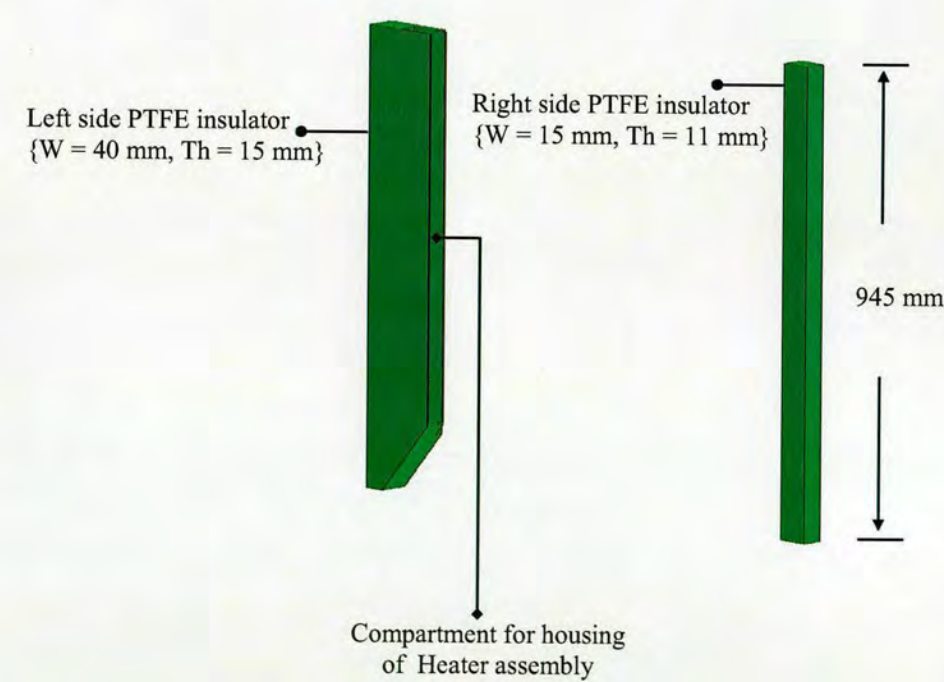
Depiction of PTFE insulators showing cavity for heater assembly
